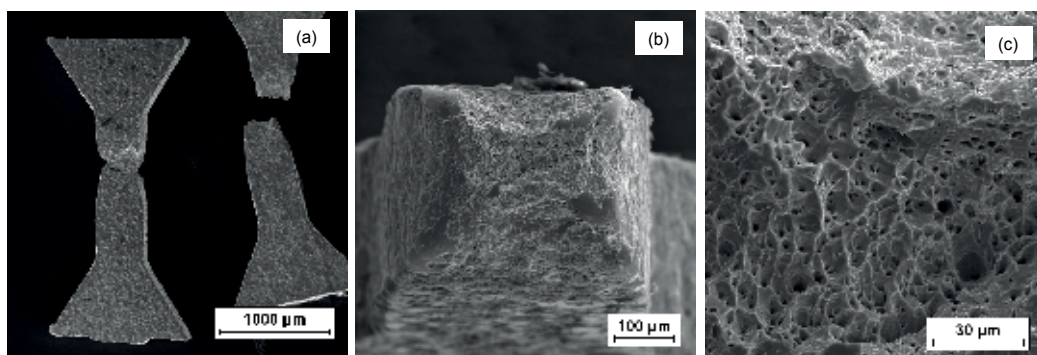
Example fracture of the specimens 4 subjected to tension, b) necking near fracture section, c) fracture surface
